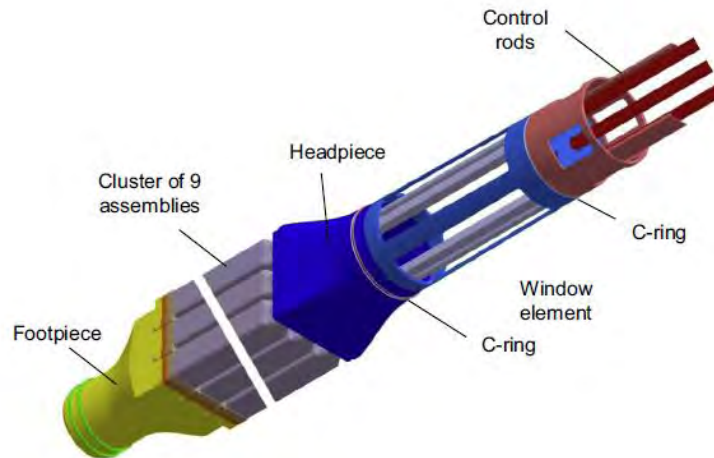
Cluster design of the HPLWR assembly comprising of Foot piece, head piece; CRs inserted in 5 moderator boxes from the top. [25].
